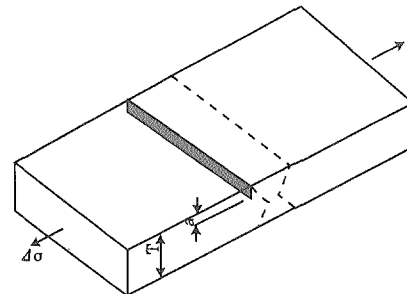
The shape of the IP defect in the lower flange butt joint weld
